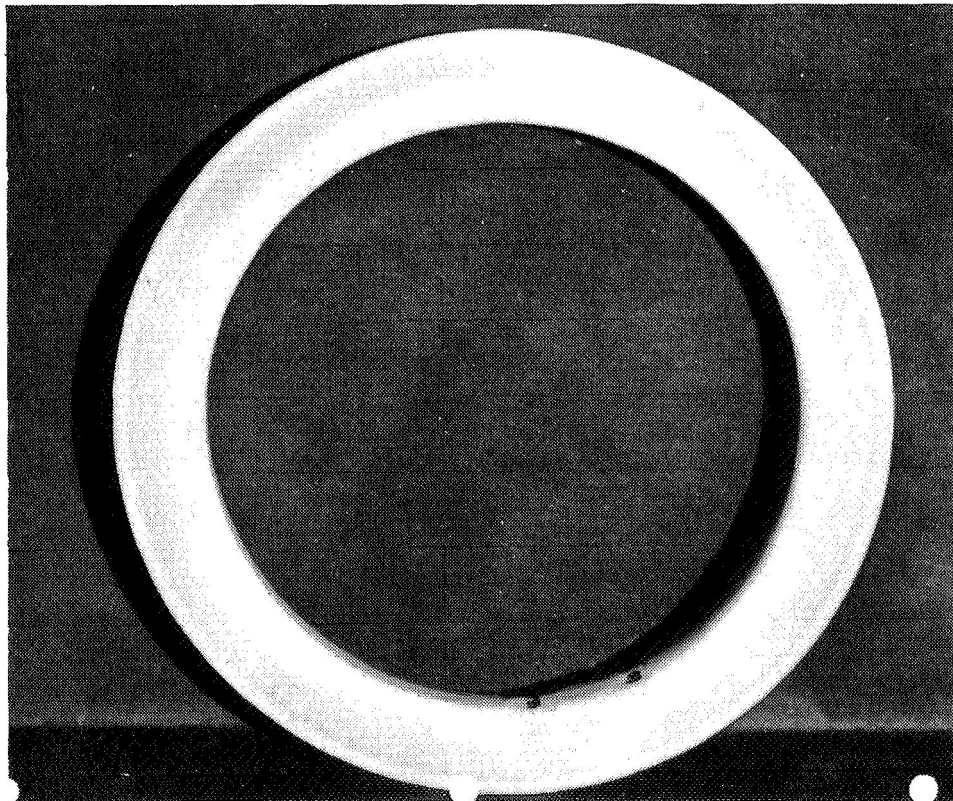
1 Valve Actuator Piston Seal (Rear Side) After Task III Testing
